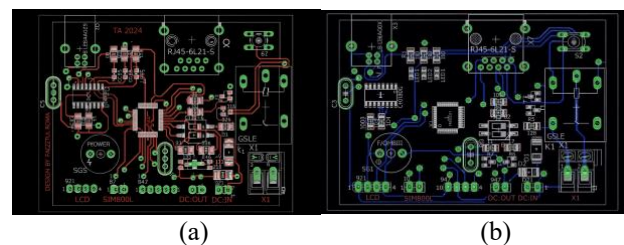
PCB Layout (a) Layout Bottom Layers, (b) Layout Top Layers
